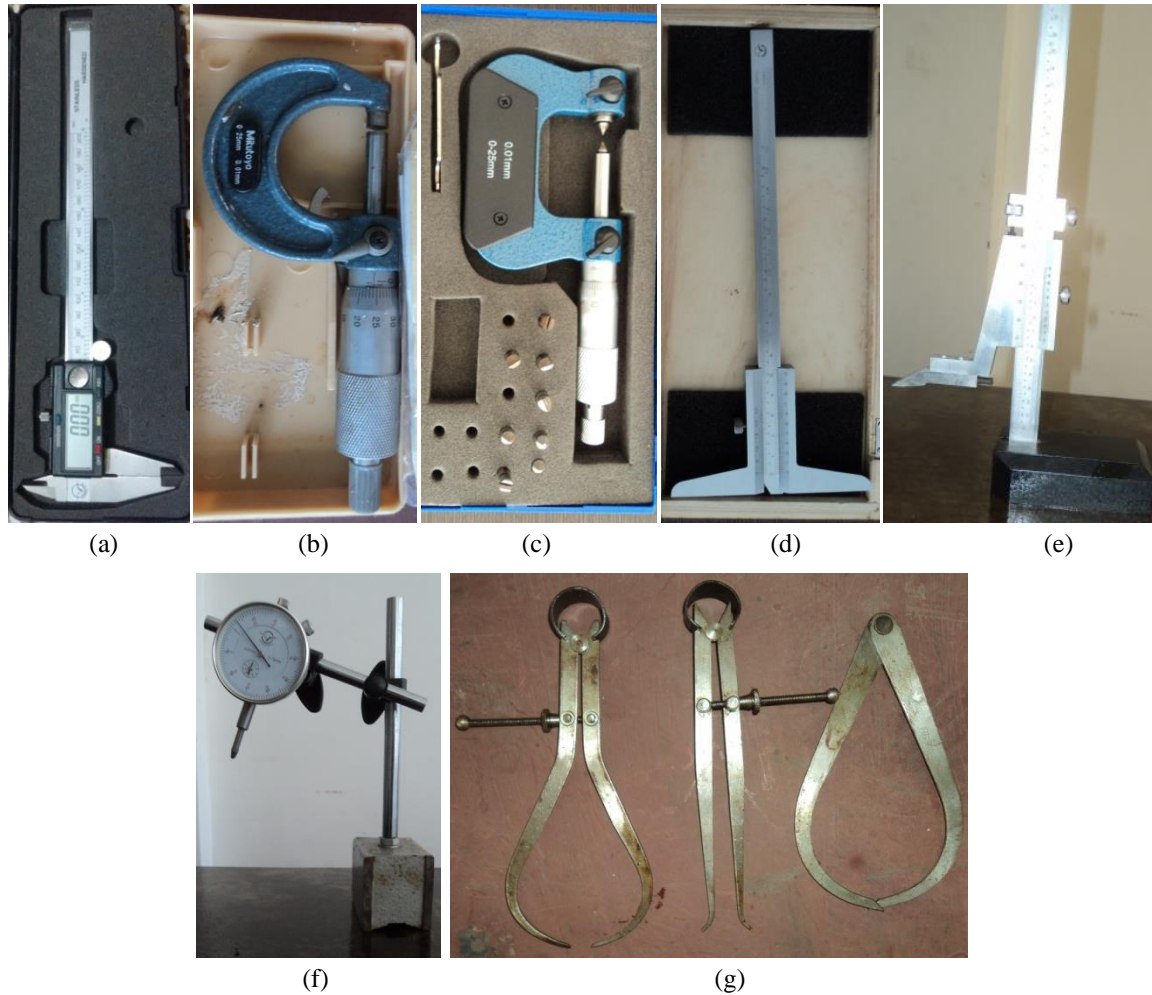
Measuring Instrument: (a) Digital Vernier Caliper, (b) Micrometer, (c) Screw Thread Micrometer, (d) Depth Vernier Caliper, (e) Height Gauge, (f) Dial Indicator, (g) Inside and Outside caliper.
